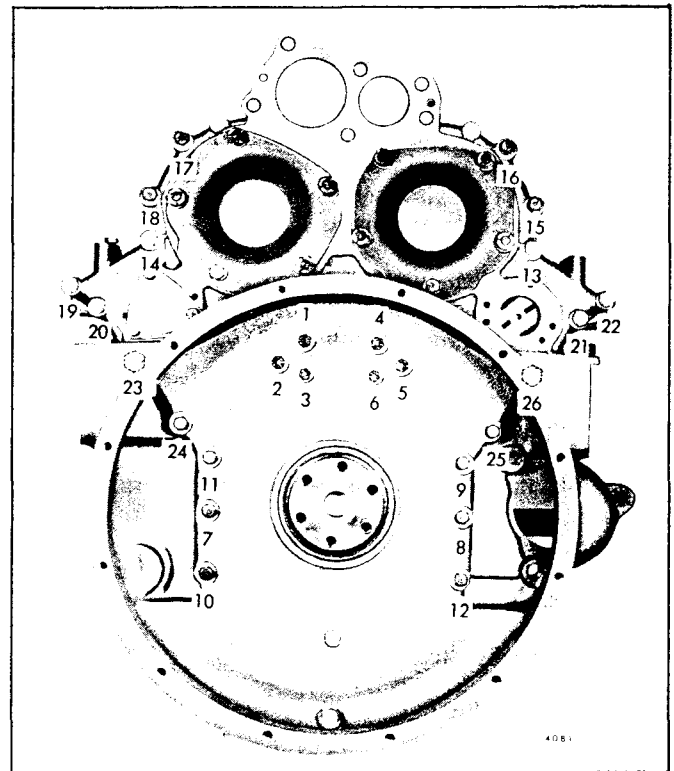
Flywheel Housing Bolt Tightening Sequence (Operation 1)-6V Engine
